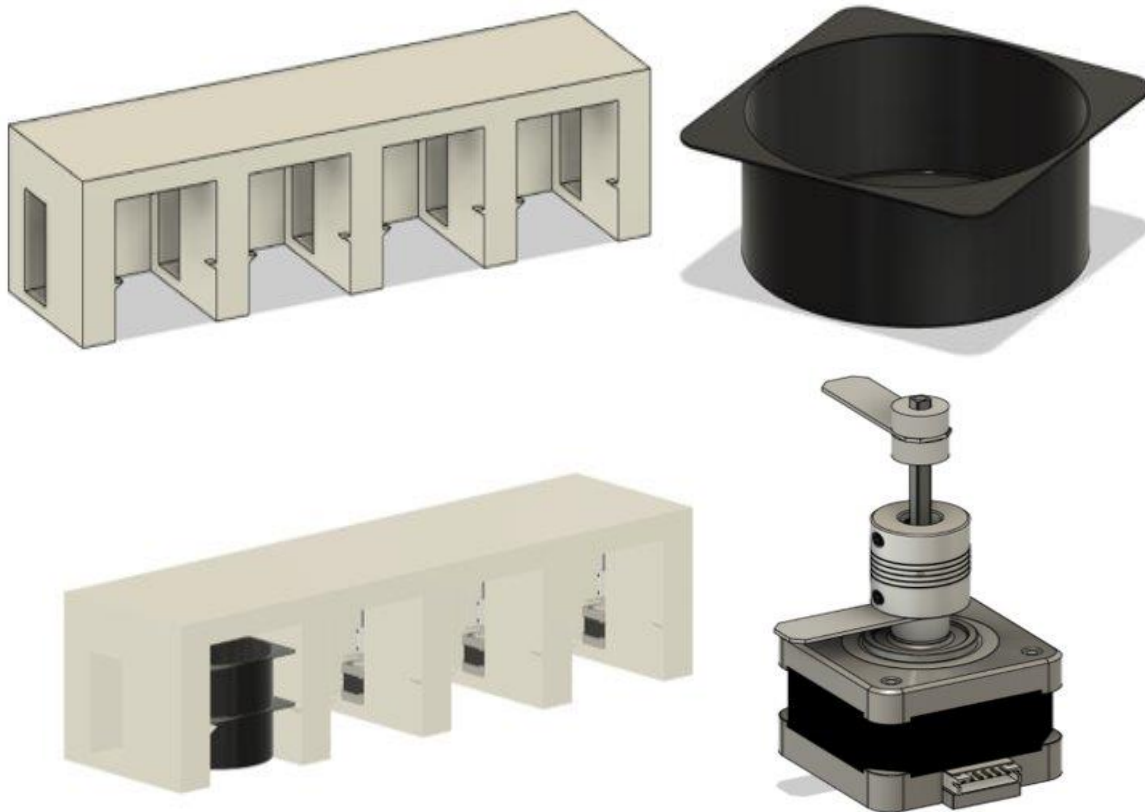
Bowl holder frame (top-left), bowl (top-right), motor with flaps (bottom-right) and finished component (bottom-left).
